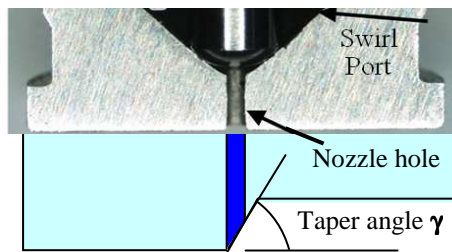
Schematic of the taper nozzle attached to the main nozzle of a DISI swirl injector
